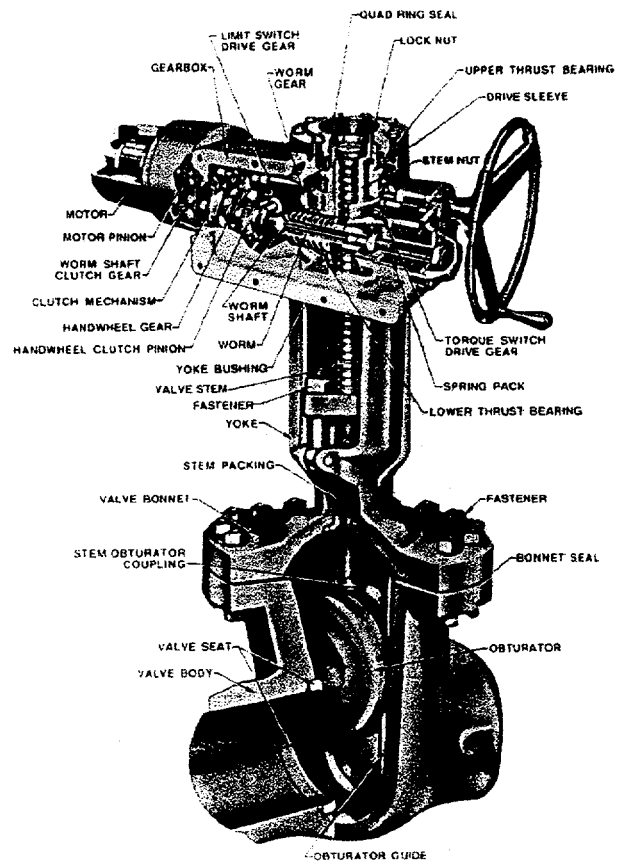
Cutaway view of a typical motor-operated valve (MOV).
